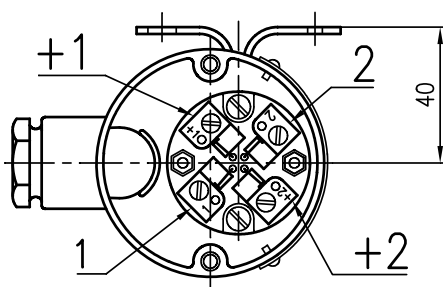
DIMENSIONAL DRAWING - DESIGN G WITH HEAD OF TYPE B PURSUANT TO DIN 43 729
